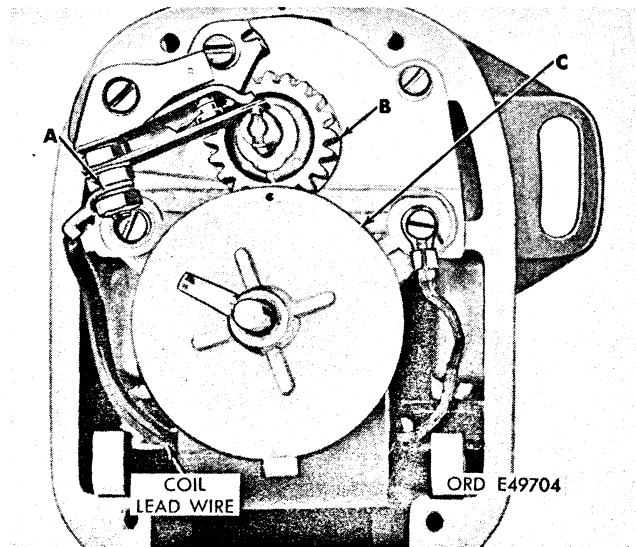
POSITIONING DISTRIBUTOR DISK AND CONNECTING COIL LEAD WIRE.
